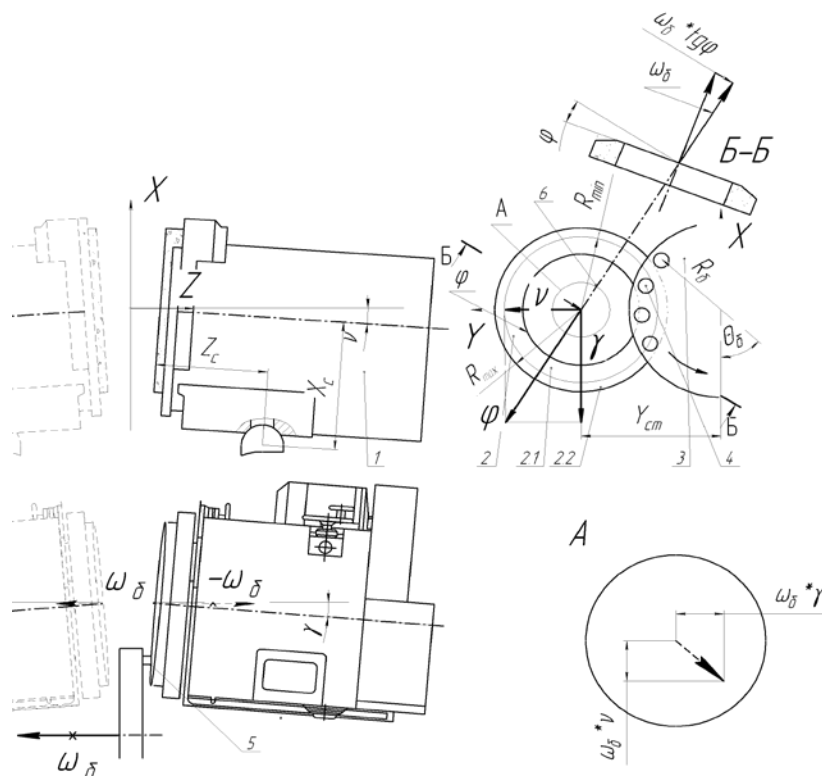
The scheme for the processing of the double-sided face grinding machine 3342 ADO
